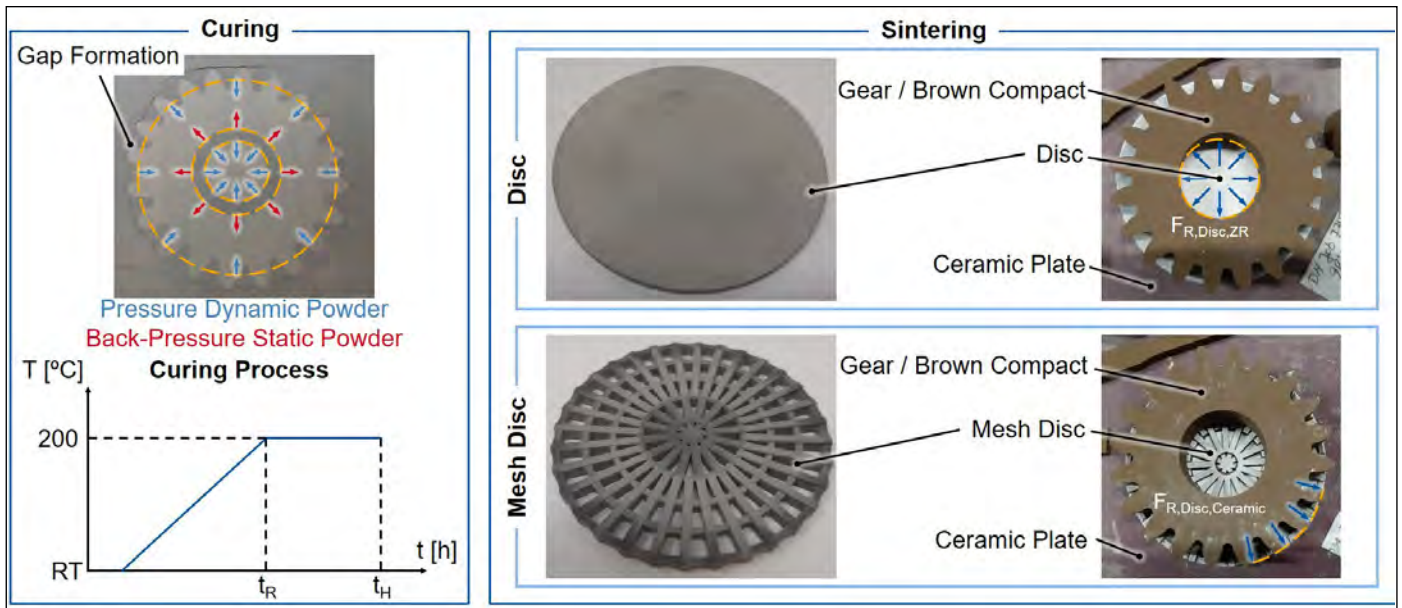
Support structures of the gear for the process steps of curing and sintering.
